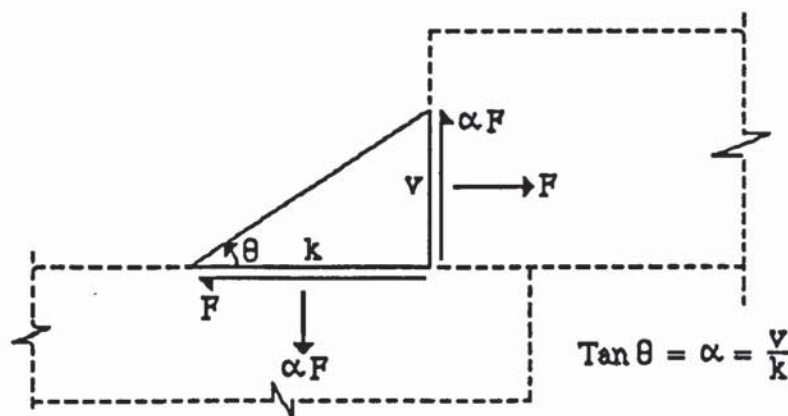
Cross - sectional view of unequal leg length weld.
